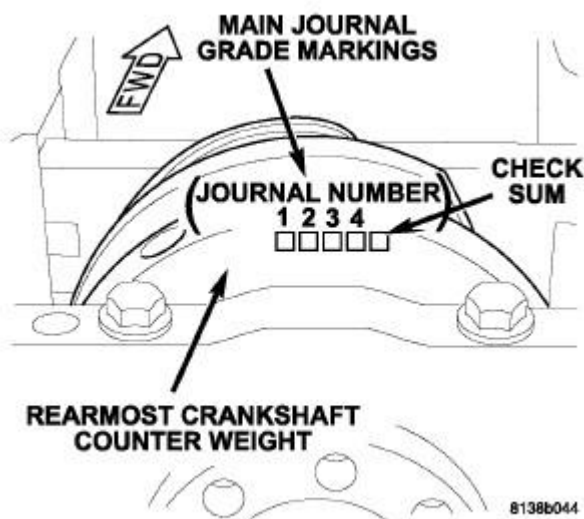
CRANKSHAFT MAIN JOURNAL GRADE MARKING LOCATION - REAR OF BLOCK
